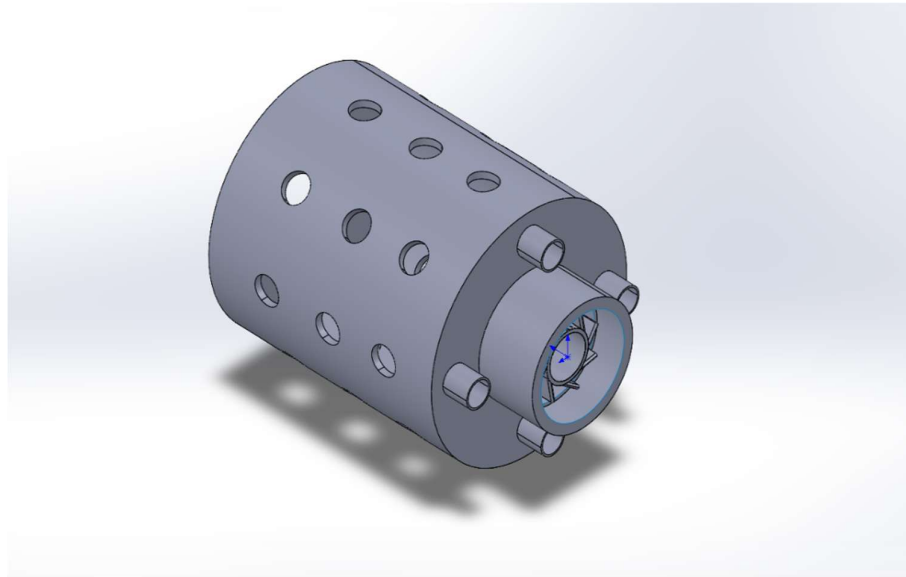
(b) *Isometric View Radial Type Swirler with Combustion Chamber.
